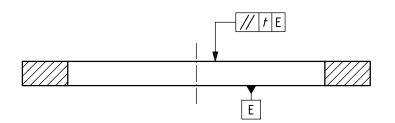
Example of a parallelism tolerance: extruded-product cut section
